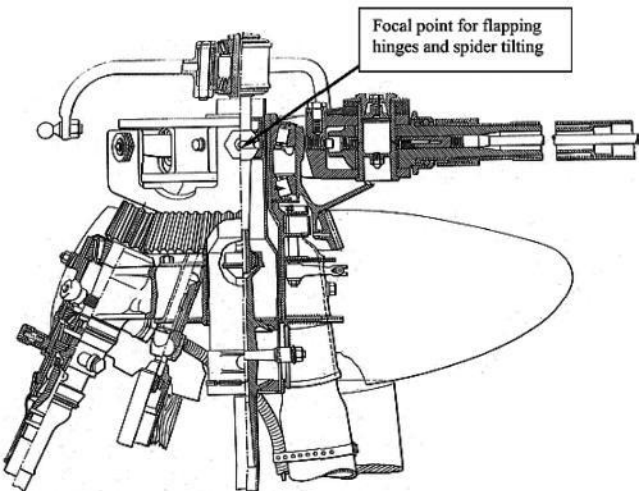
Layout details of the Hafner A.R. III rotor head [74].
